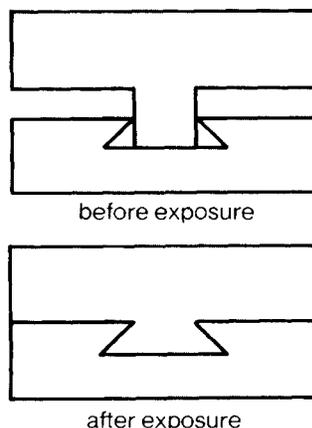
Joint design for vibration welding dissimilar materials to GE Plastics Lexan polycarbonate.
